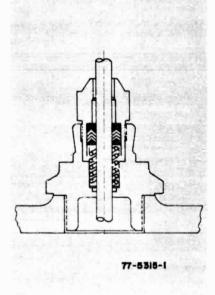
V5011A & C SCREWED 1/2 TO 3 IN. BRONZE BODY VALVE -150 PSI (1035 kPa). PACKING SHOWN
